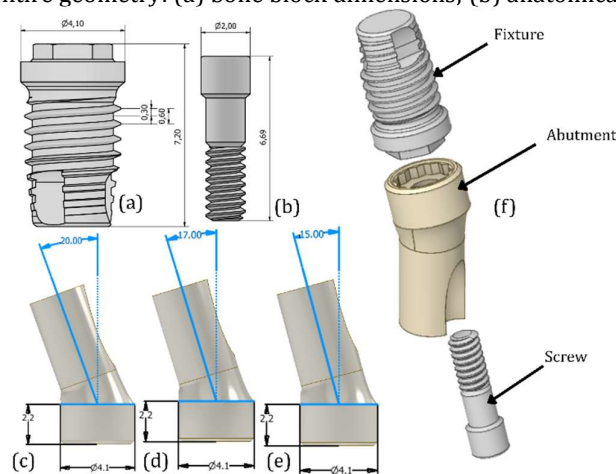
Dental implant configurations: (a) fixture; (b) screw; (c) abutment 15°; (d) abutment 17°; (e) abutment 20°; (f) implant assembly
